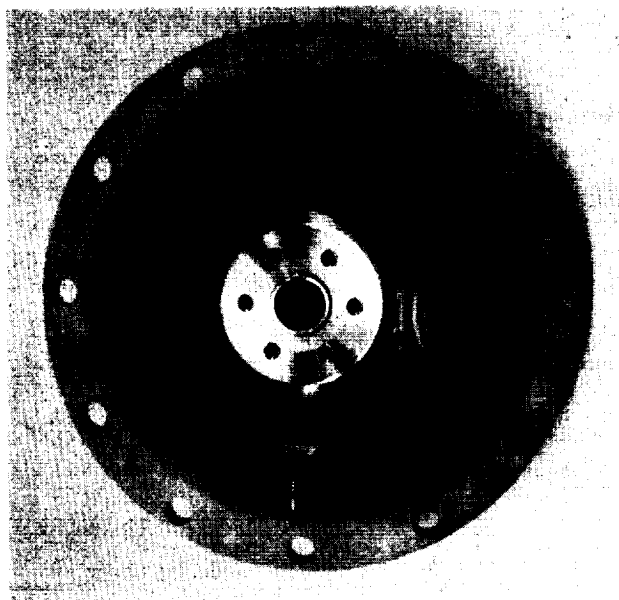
72-Element Injector Manifold Before Face Plate Bonding
